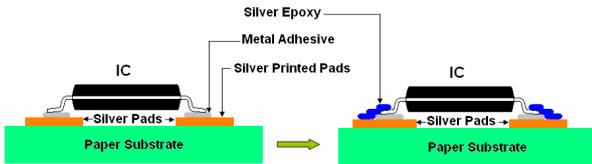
Assembly process for components on inkjet printed silver pads on paper substrates.
